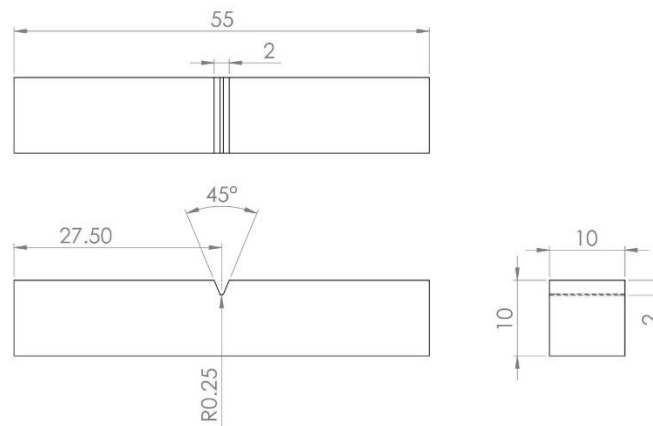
Charpy test specimen drawings (dimensions in mm)
